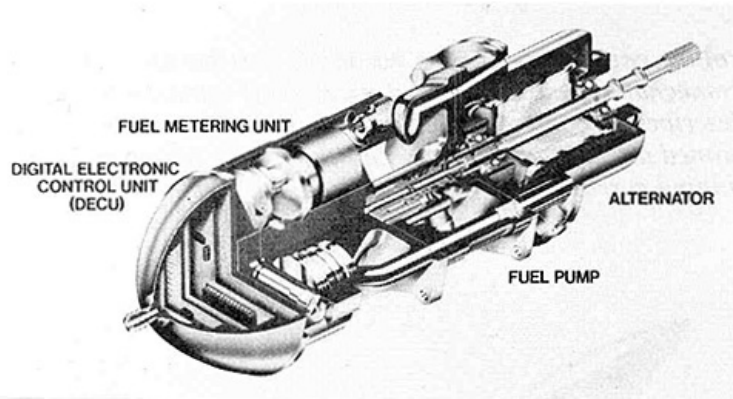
Cutaway View of Teledyne CAE 373-8 RPV Engine Control System [6]
